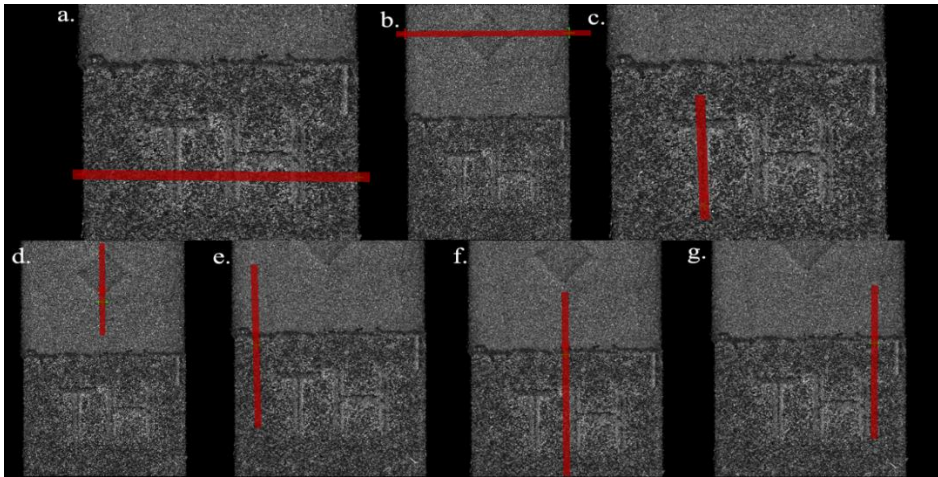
Geometrical accuracy measurement tracks on the as-manufactured sample.
